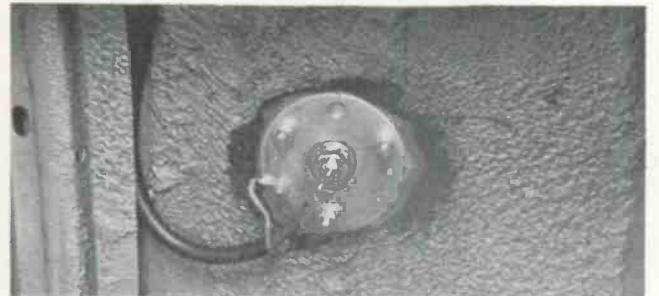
Completing job with coaxial cable bolted to antenna mount.
